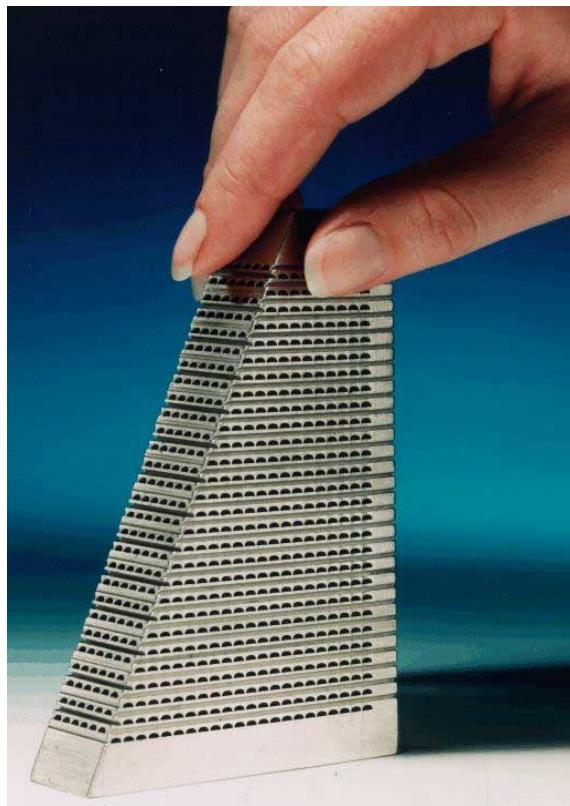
Cross-section Through a Typical Printed Circuit Heat Exchanger Core
